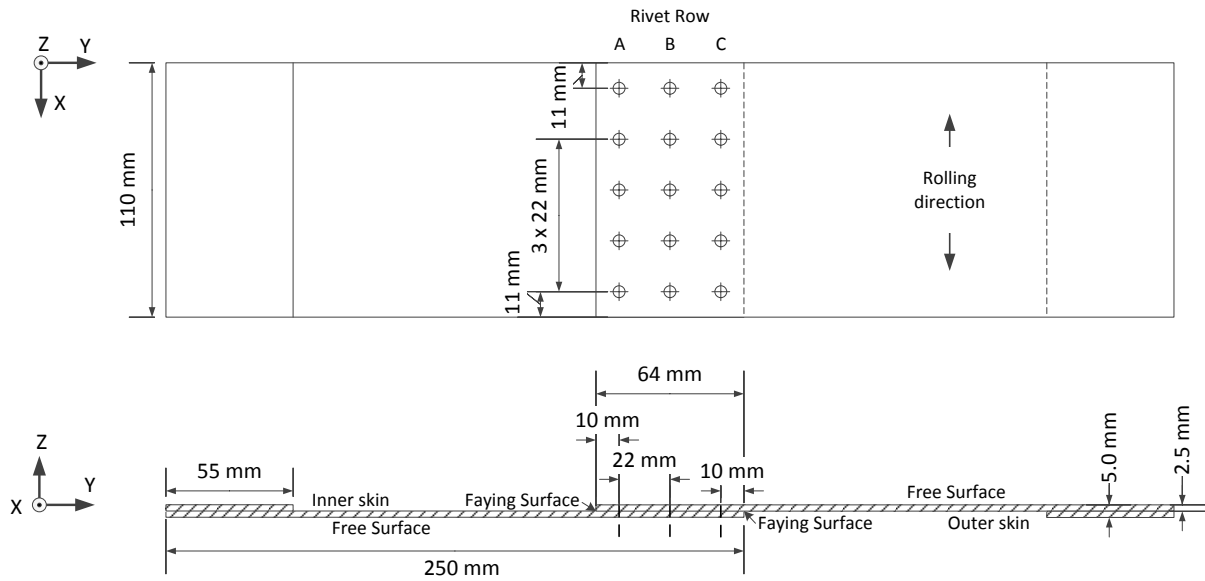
Drawing of the fastened Lap-Joint fatigue test sample, the defined coordinate system and the definition of fastener rows A, B and C.
